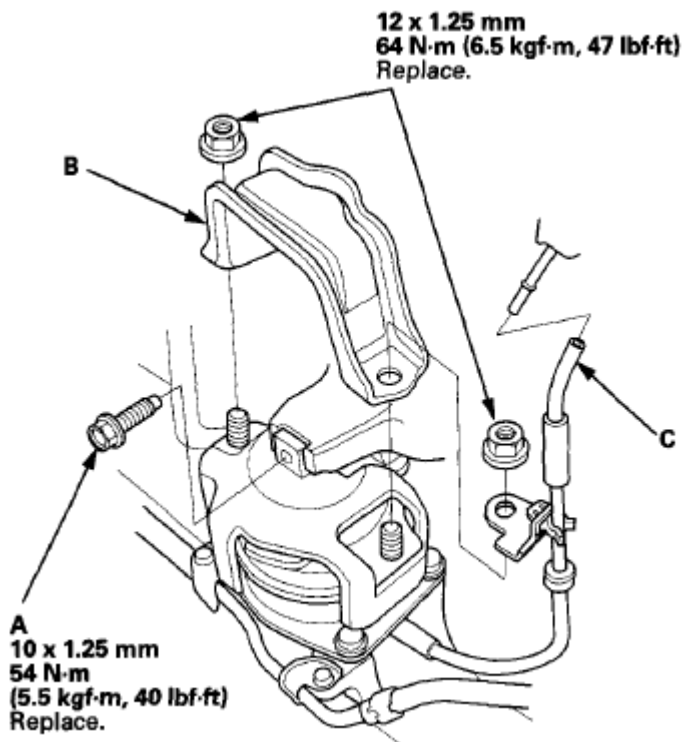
Installing Front Engine Mount Stop With Torque Specifications
